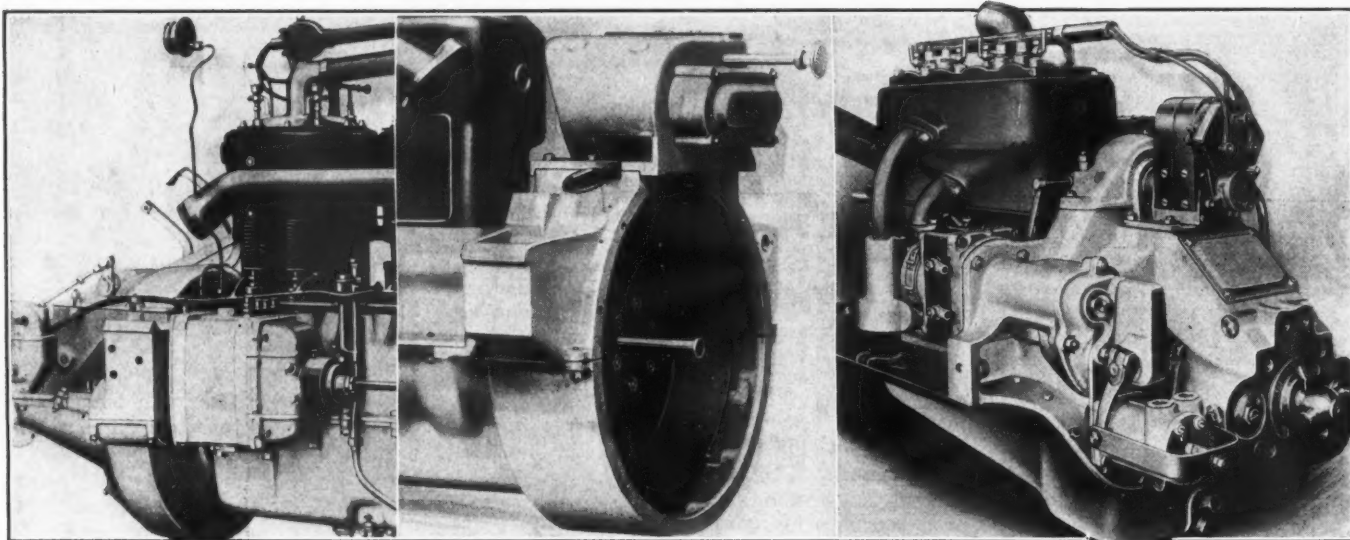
Three flywheel-sliding pinion starting equipments: Left, Delco on Packard. Center, Gray & Davis motor on Pathfinder. Right, Westinghouse on Hupmobile
